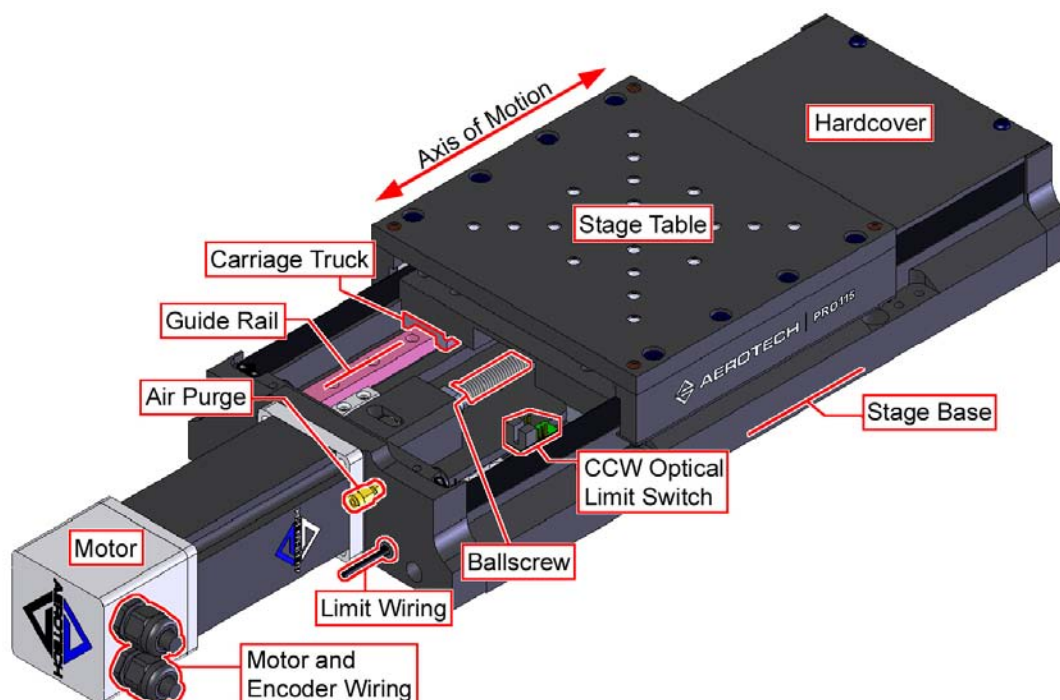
PRO115 with Cutaway View of Ballscrew
